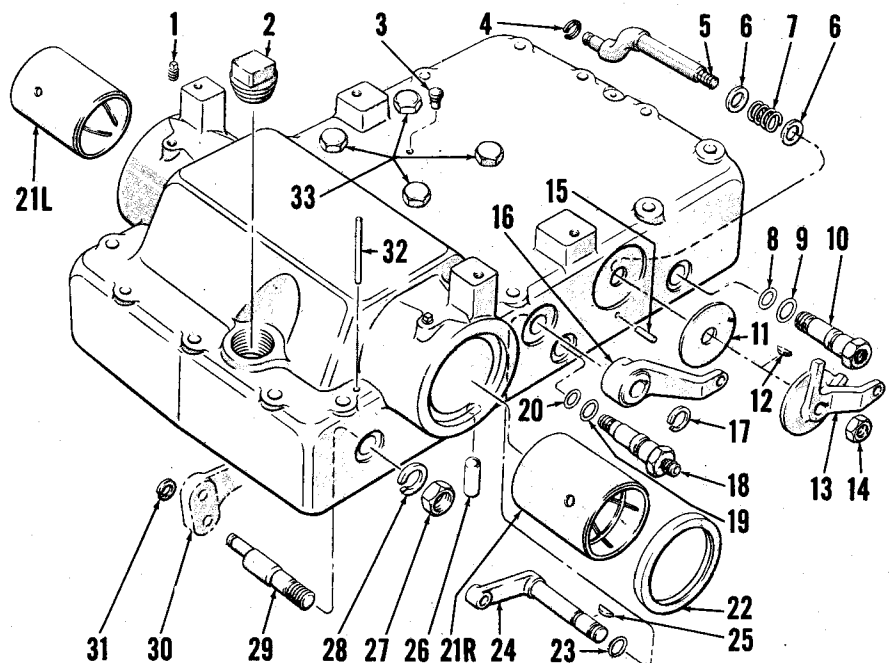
Exploded view of hydraulic lift cover. Pressure sleeve (10) and pilot sleeve (18) thread into control valve body (24—Fig. 219). Control lever friction disc (11) keeps lever in desired position; spring (7) is adjusted by tightening nut (14). Cap screws (33) retain lift cylinder to cover.
